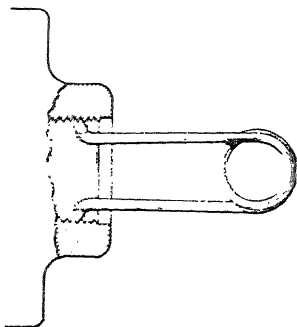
Spring cleaner for chuck plate or faceplate. Made of drill rod or hard brass. May be used for various sizes.
